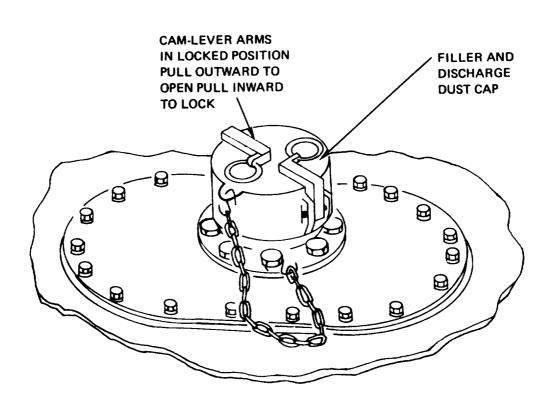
Filler and Discharge Dust Cap, All Tanks.
